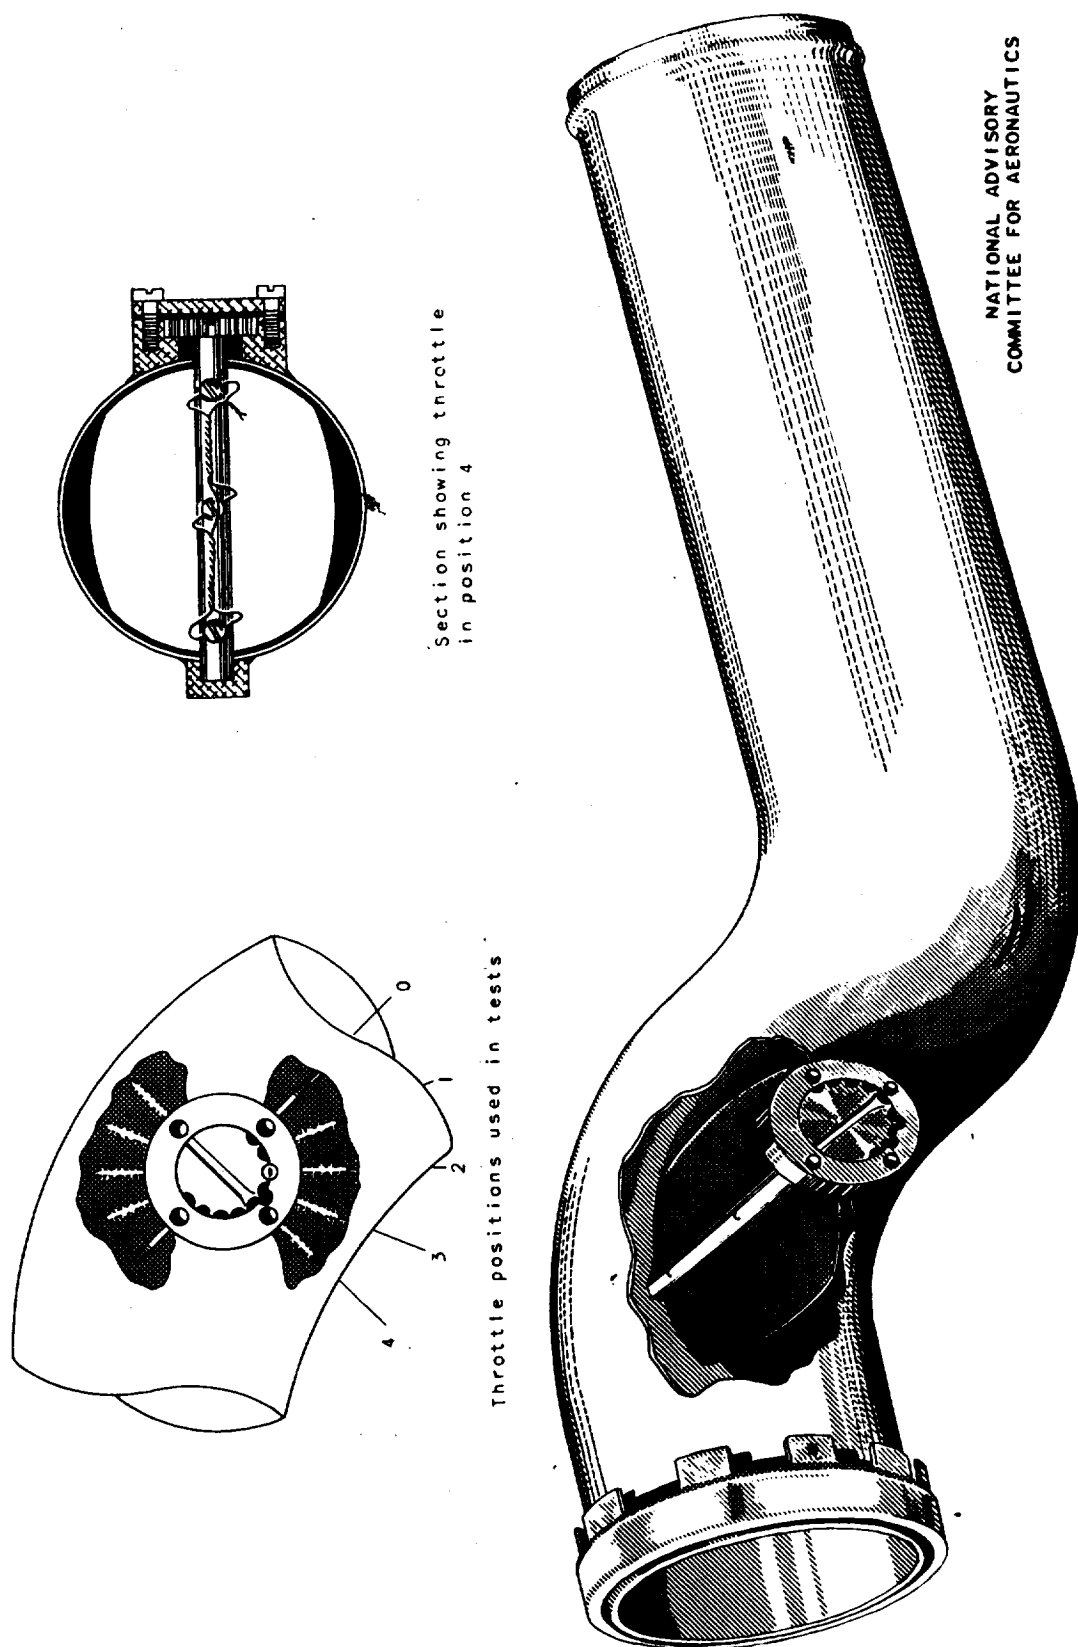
Throttle in intake pipe of cylinder 10 on R-2800-21 engine.
